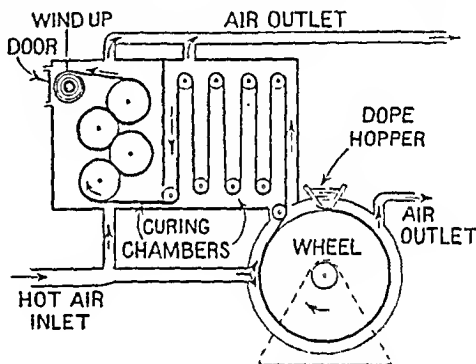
DIAGRAM OF WHEEL COATING MACHINE FOR MAKING FILM BASE.
